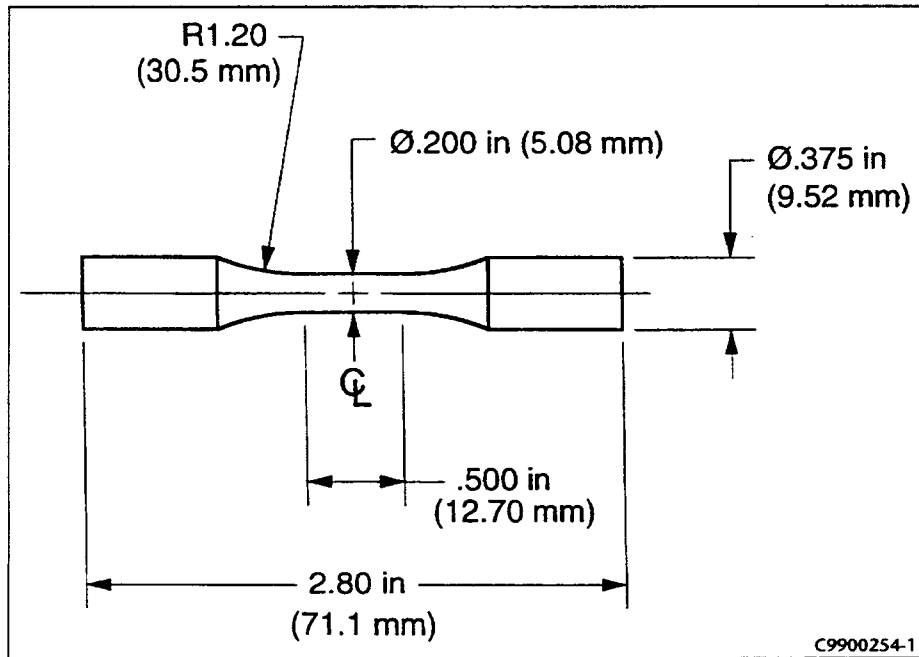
Fatigue specimen dimensions. Specimens fabricated utilizing low stress grinding, blended radii, and polished gage section.
